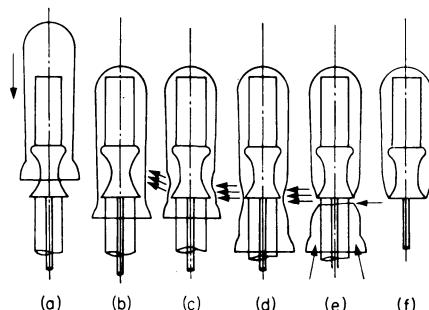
Drop sealing process: (a) lowering the bulb over the stem; (b, c) heating with soft flames; (d) sealing the bulb to the flared stem; (e) cutting (dropping) the excess glass; (f) sealed device, ready for pumping
